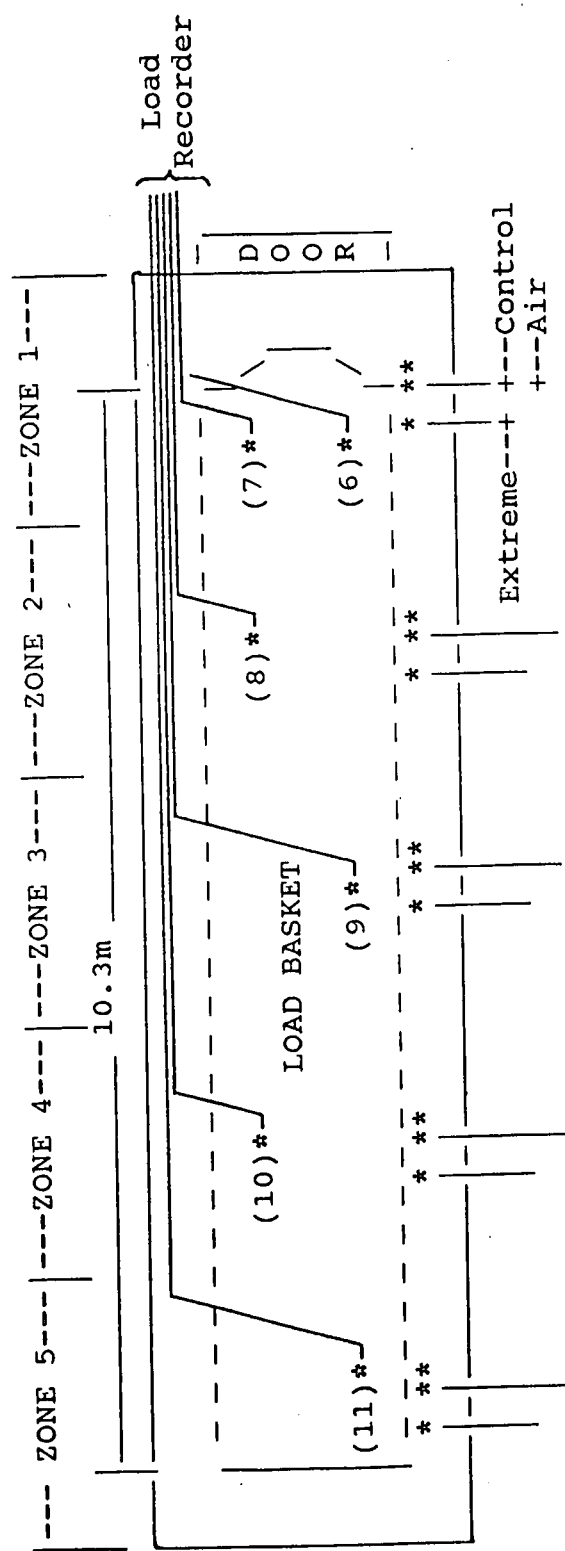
Typical furnace layout. Side view of five zone aluminium heat treatment furnace. Air, control and excess temperature thermocouple entry ports shown on each zone side module.
